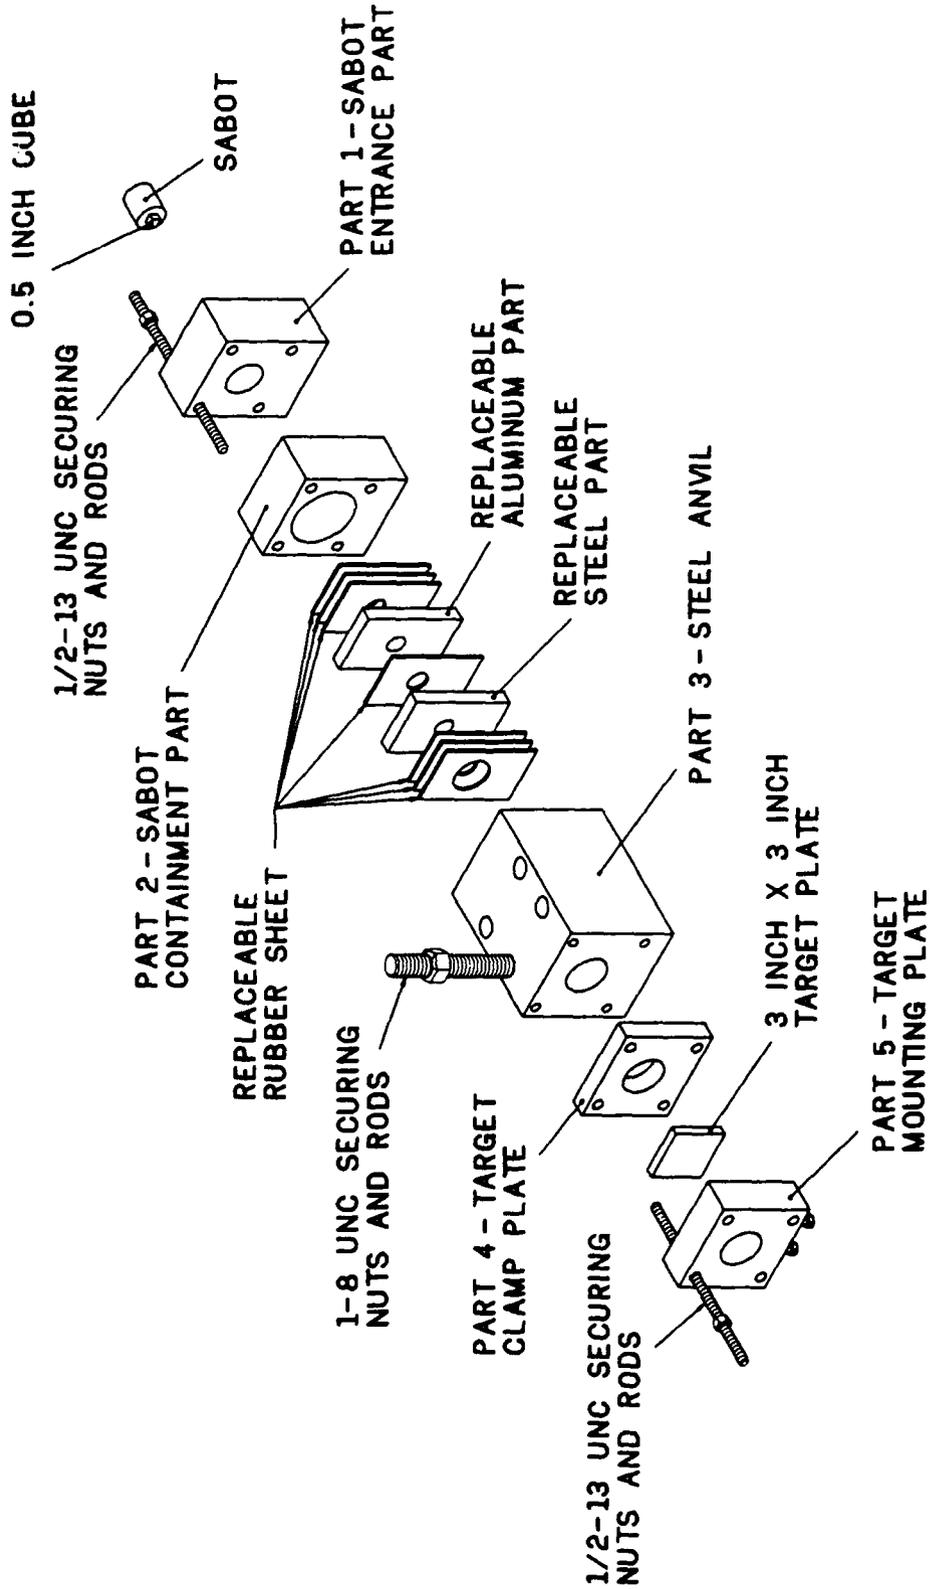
SCHEMATIC OF SABOT STRIPPER WITH ATTACHABLE SMALL TARGET ASSEMBLY
